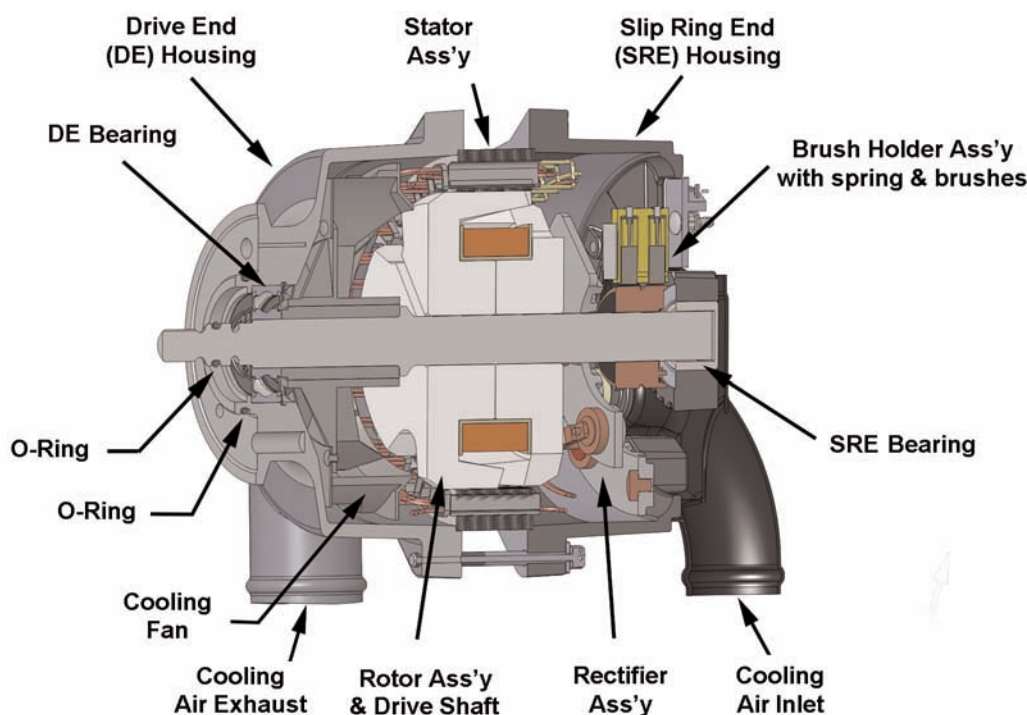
Typical Alternator Cutaway (Basic Components)
